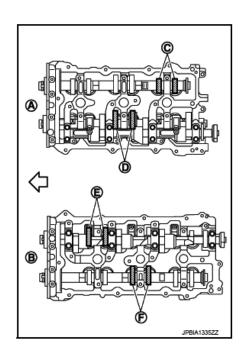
Rotating Crankshaft 240 Degrees Courtesy of NISSAN MOTOR CO., U.S.A.
